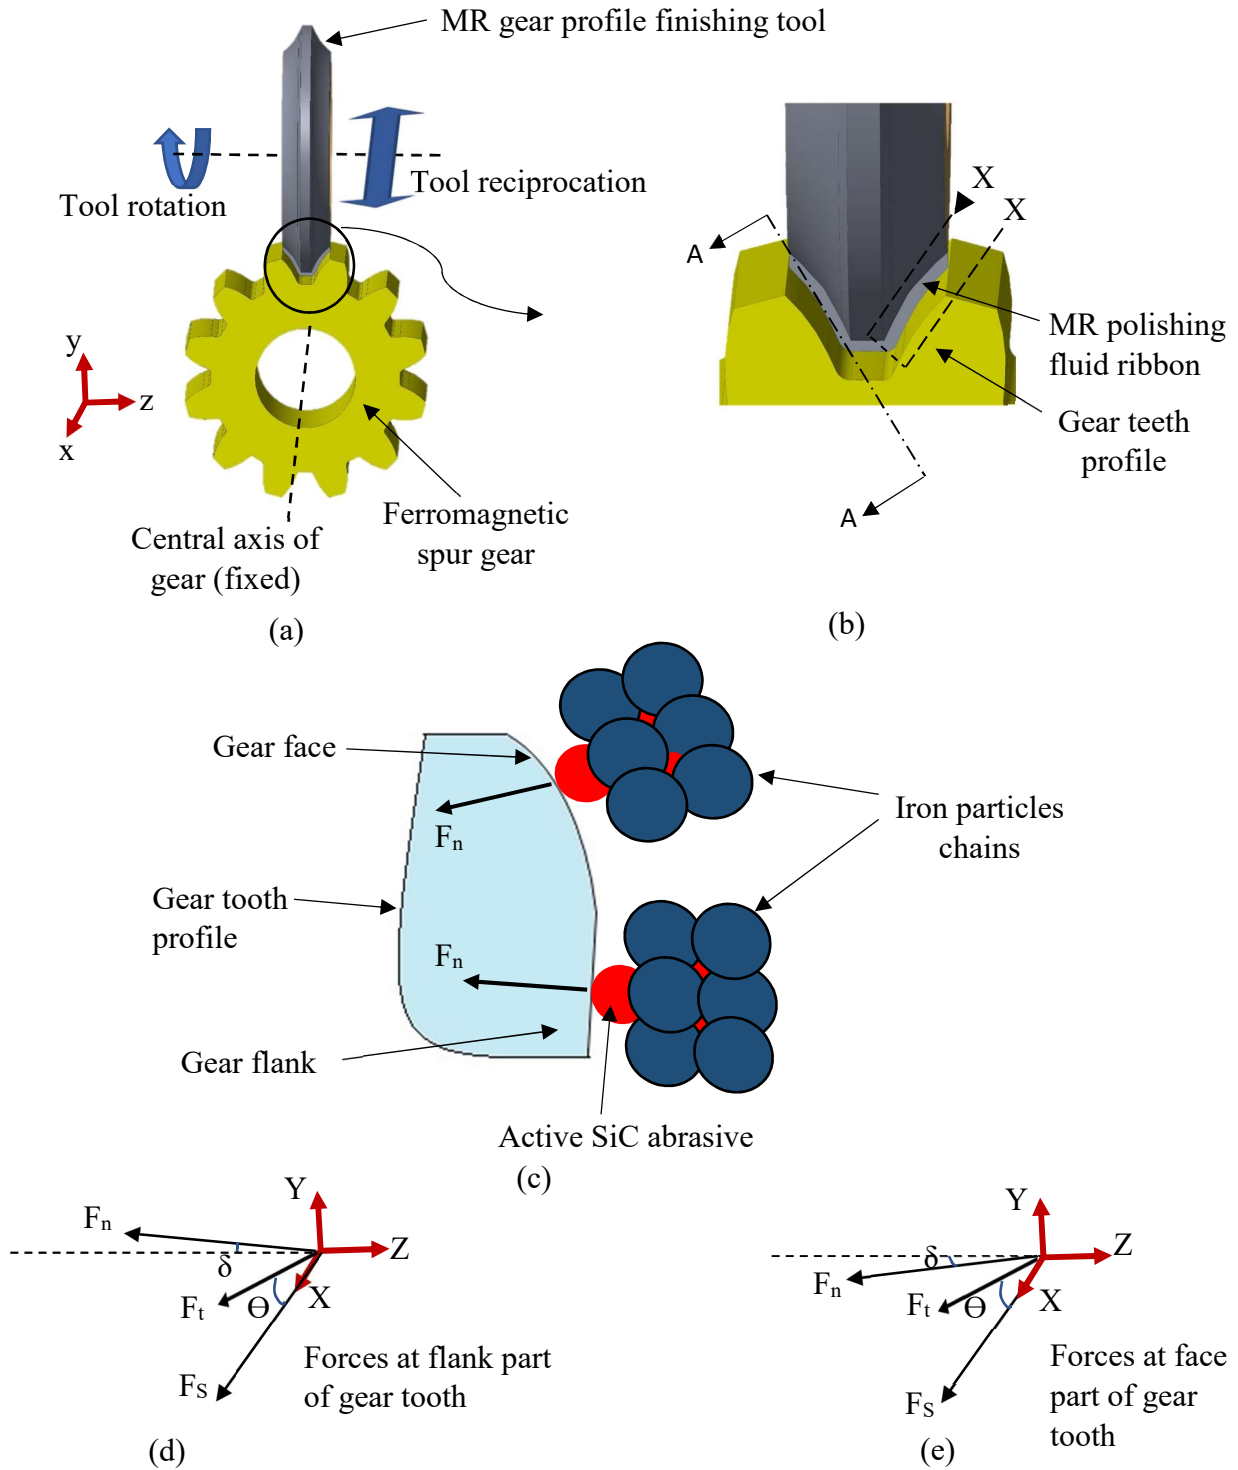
(a) Mechanisms of material removal and forces during finishing of gear teeth profile, (b) cross-sectional view (A-A) and (X-X) of intersection of MR fluid with gear teeth profile, (c) active Sic abrasive indent on gear tooth face and flank through the iron particle chains, (d) forces acting on gear tooth flank and (e) forces acting on the gear face during the finishing operation
